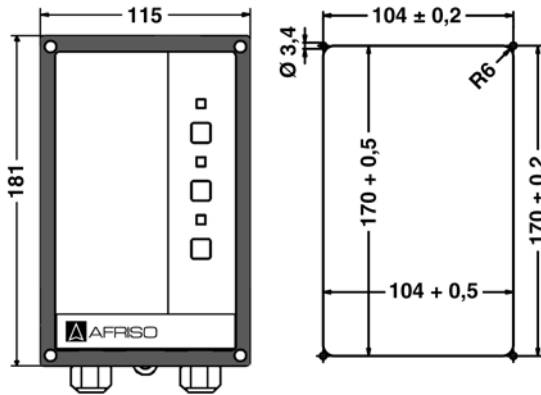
Control unit with mounting frame for panel mounting; right: control panel cut out
